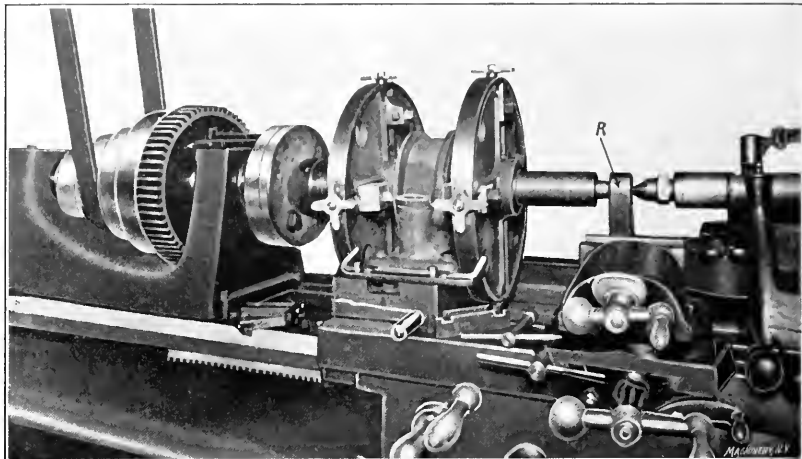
Special Boring Rig for Finishing Elliptical Blower Casings.
